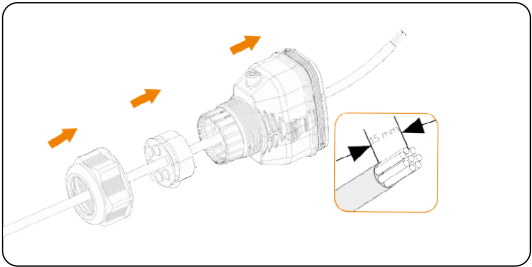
Threading the cable without the RJ45 terminal and stripping
